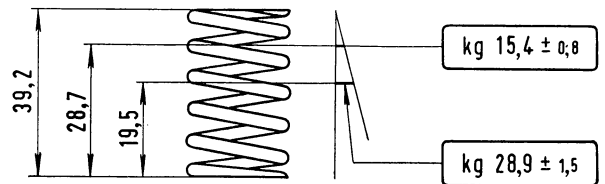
115 C.005 engine inner valve spring testing data.
